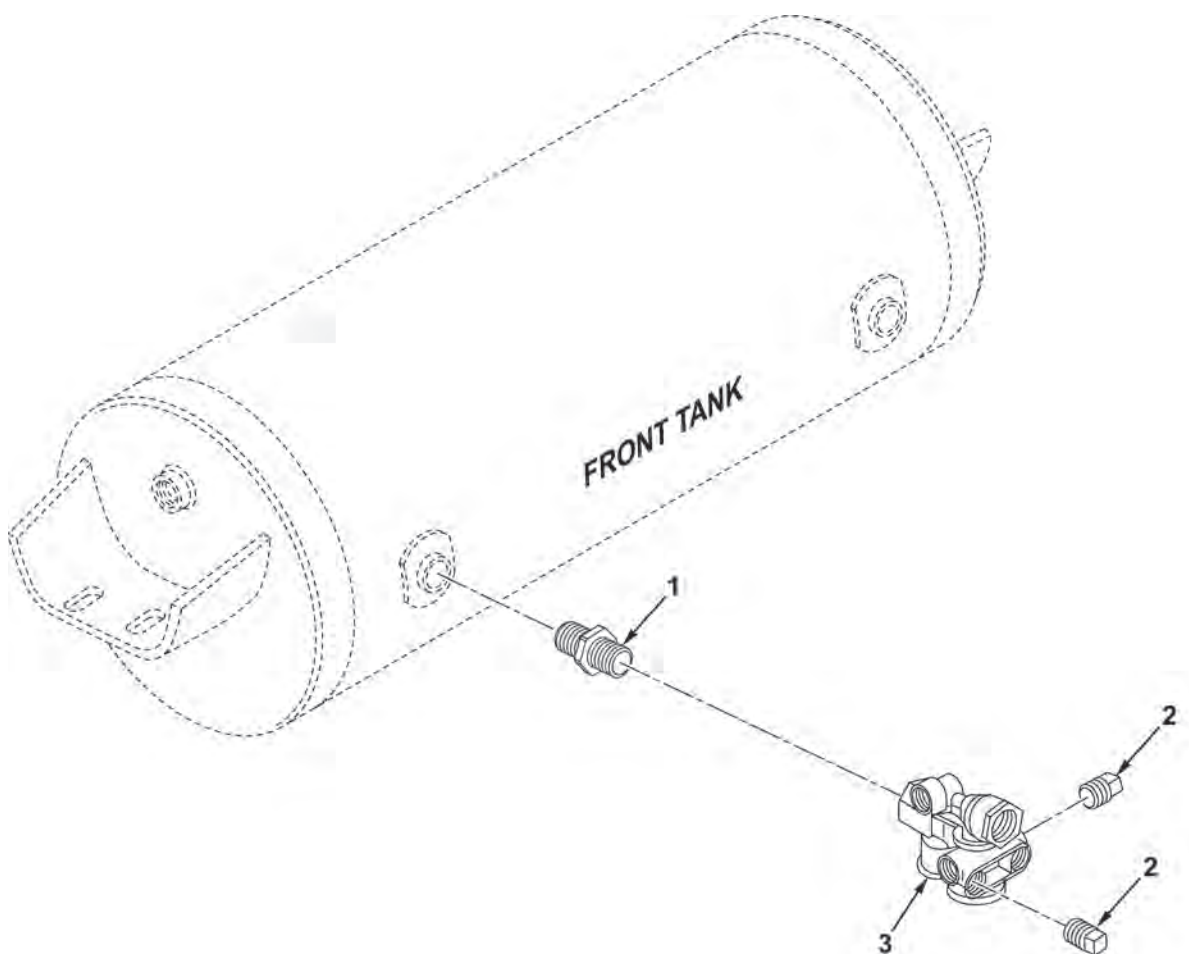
Air Brake Chamber Control Valve Removal and Installation.
